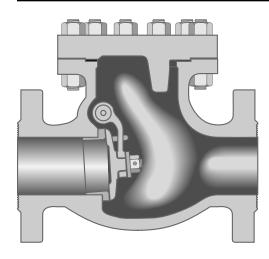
Flanged Figure 159½ Butt Weld
